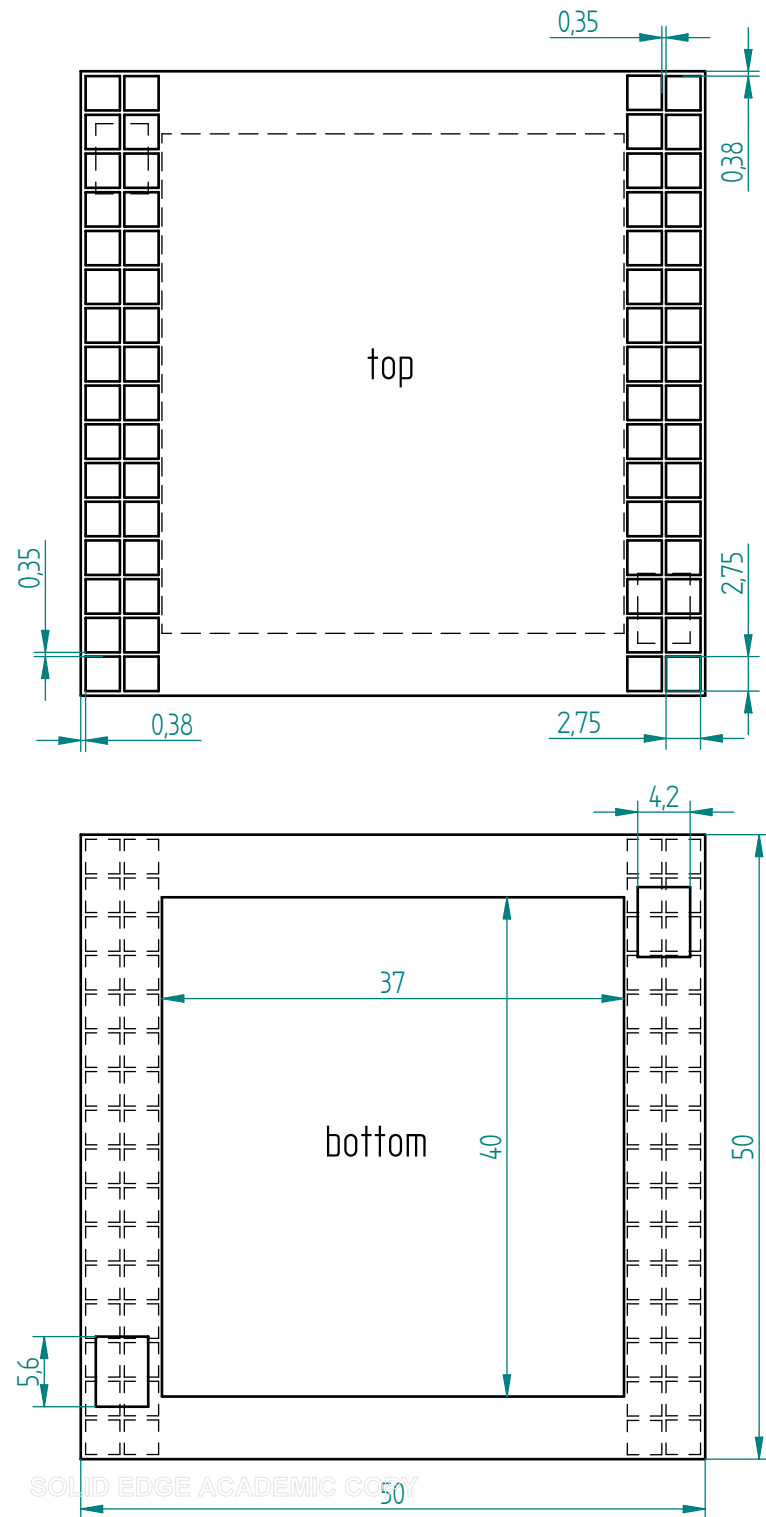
Technical drawings of the boiling chamber's top and bottom stainless steel lid.
